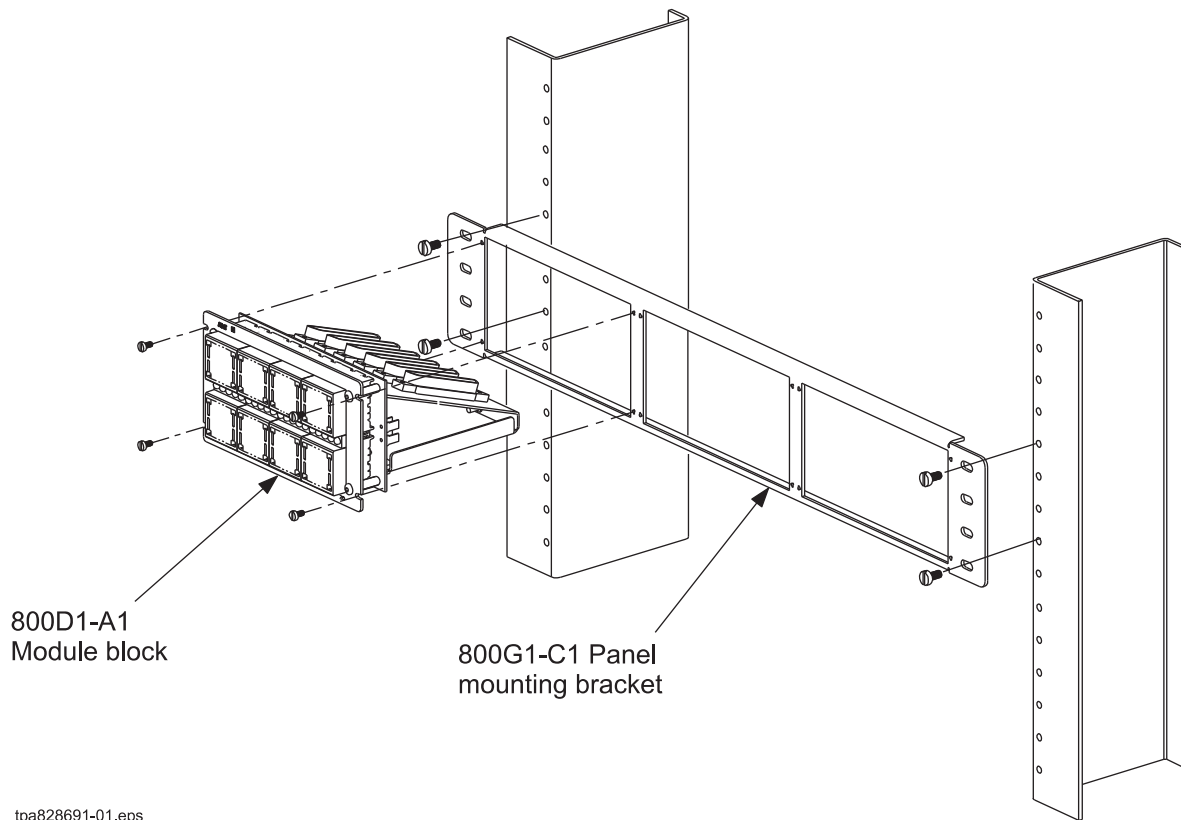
800G1-D1 Interbay Patch Panel Assembly
